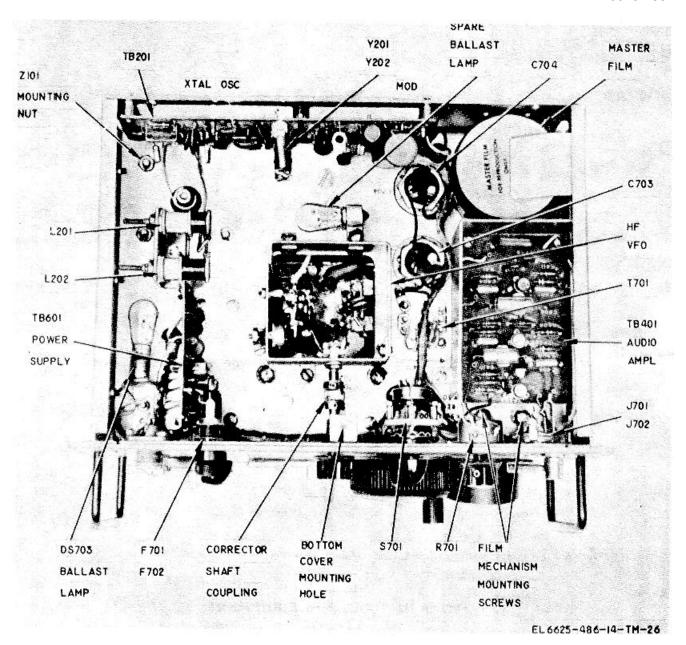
Frequency Meter FR-149/USM-159, location of parts, bottom view.
